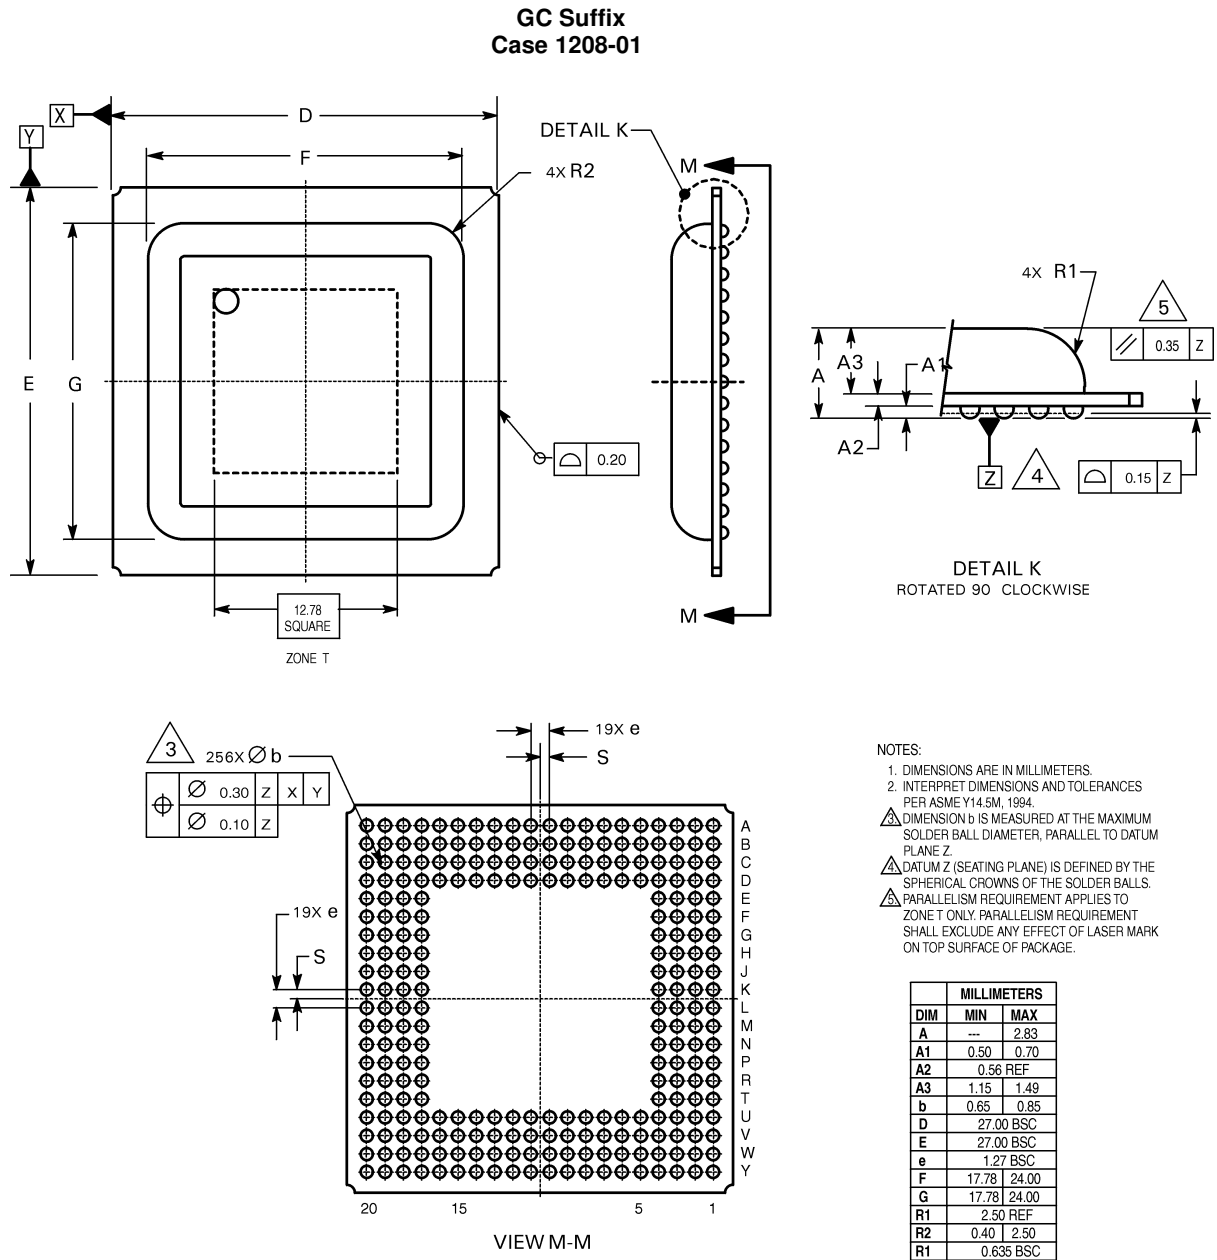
Glob-Top Ball Grid Array (GTBGA) Package
